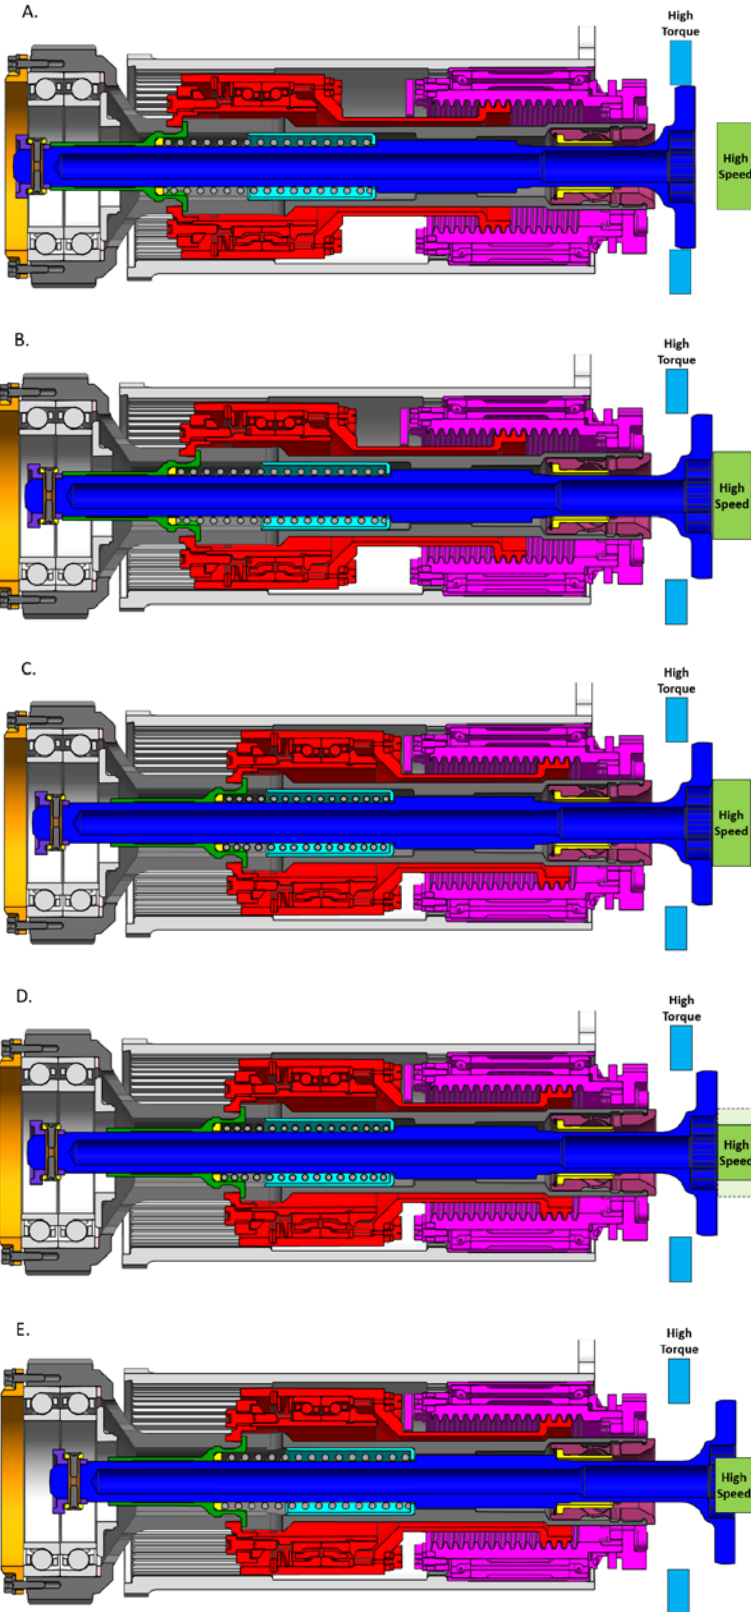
STIG parts in detail. Red parts translate axially (and in some cases, rotate). Magenta parts rotate without translating. The selector (dark blue) is supported on its right side by the spindle actuator (not shown) and on its left side by a bushing mounted to corer structure (not shown). The right end of the output shaft is supported by splines that ride on the outside of the selector and on its left side by corer structure (not shown).
